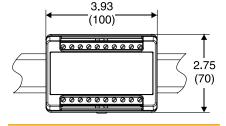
Wide Case Size in Inches (millimeters) (Front View)
